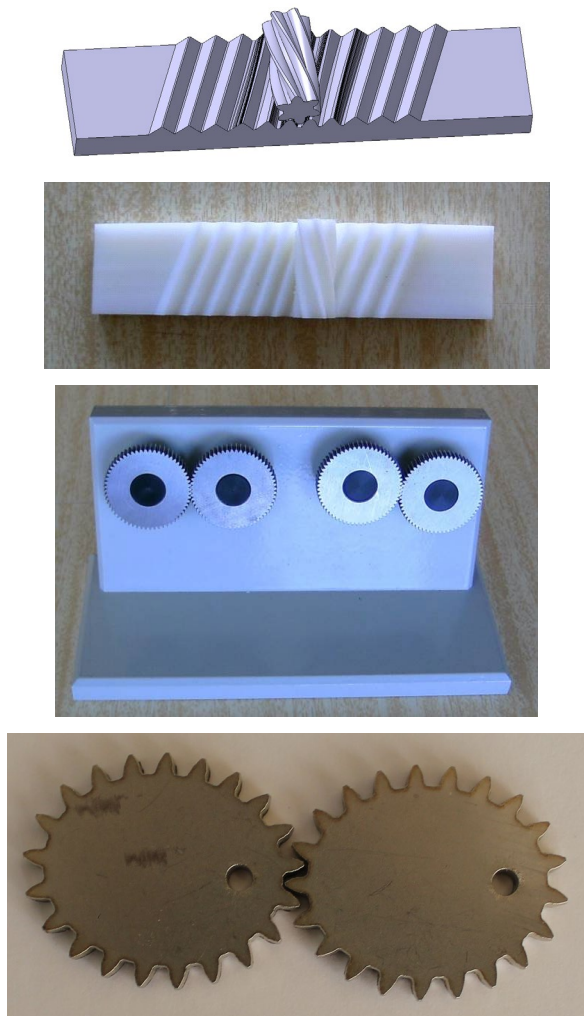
Variable gears and asymmetric cog profile: model and prototype of comb gear with inclination of teeth, eccentric gear with round wheels and elliptical gears with asymmetric profile, made with laser cutting.
